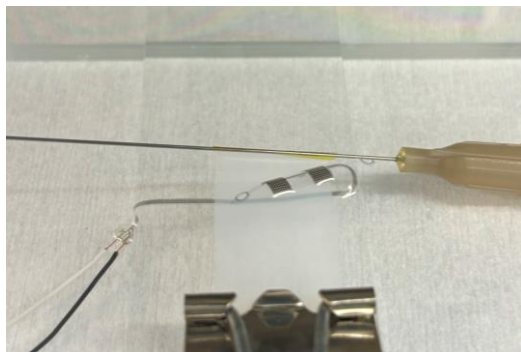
Initial placement of the device on the thermoforming fixture.
